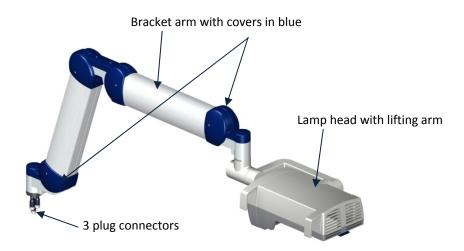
Pre-assembled unit with lamp head, lifting arm and bracket arm
